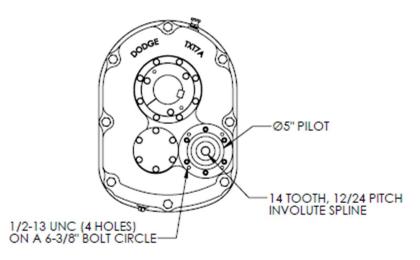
SAE "C" Mounting Flange- 4 Bolt (1/2" bolts) with 14 tooth spline
